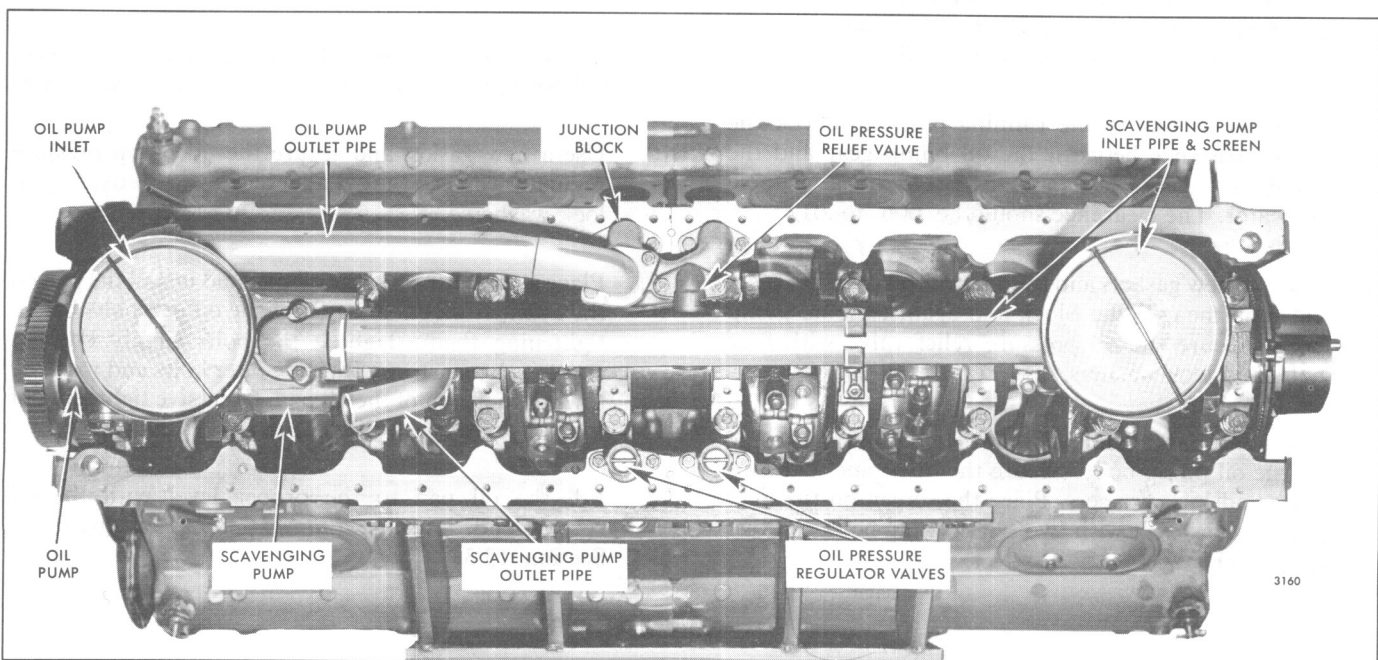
Typical Lubricating Oil Pump Rear Mounted (12V-92 and 16V-92 Engines)
